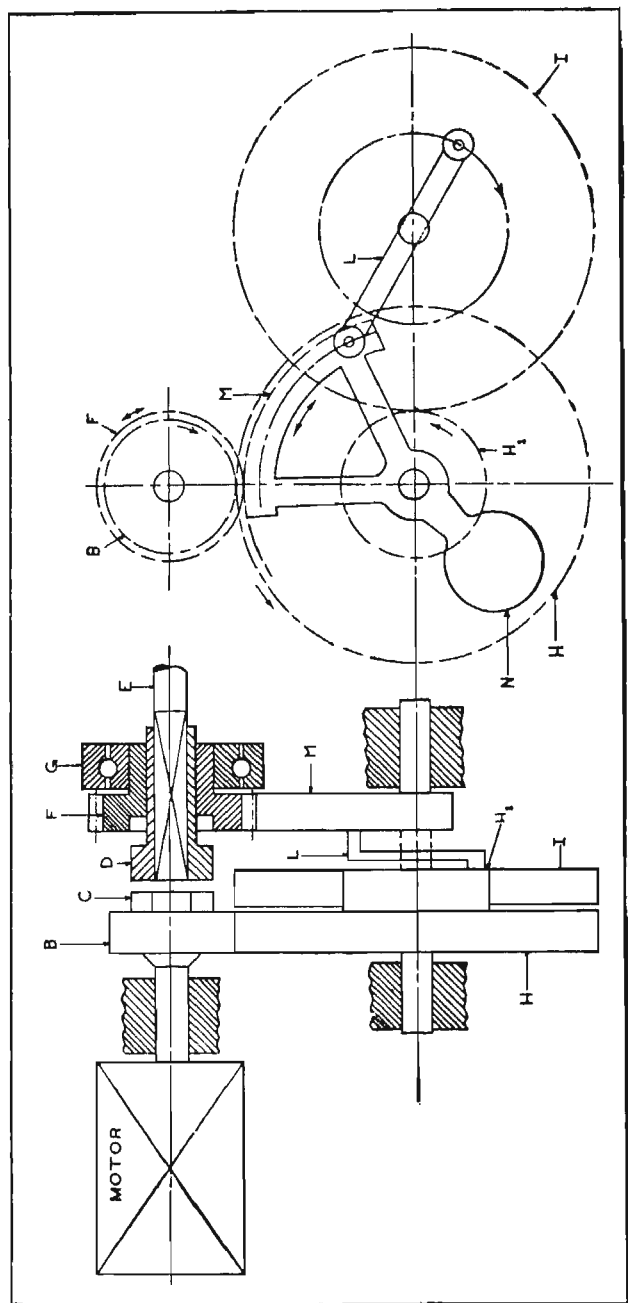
Mechanism for imparting either oscillating or continuous rotary motion to driven shaft E.
